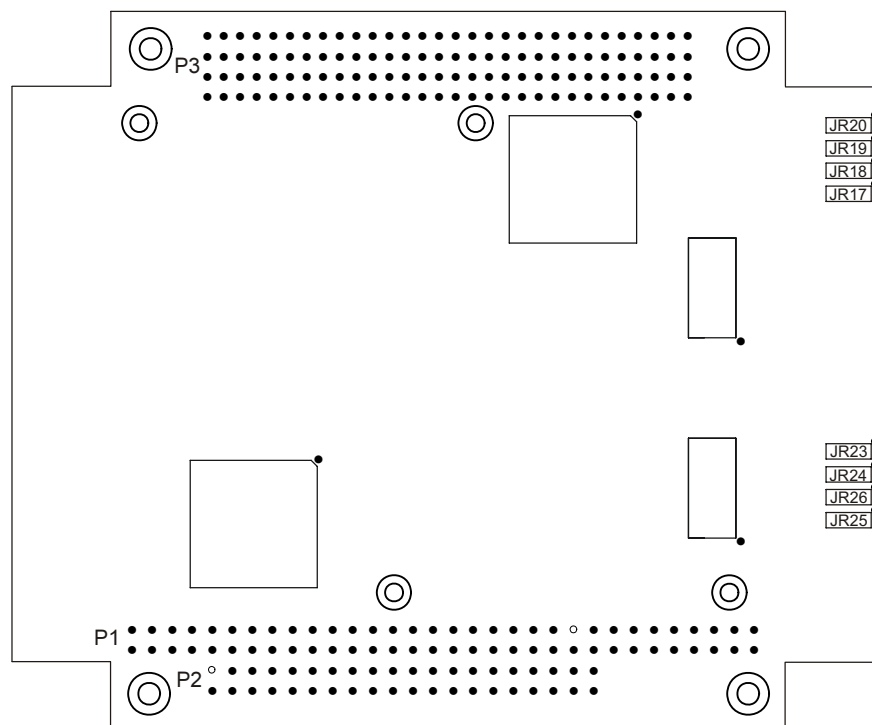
EXC-4000P104plus Board Layout – Bottom View
